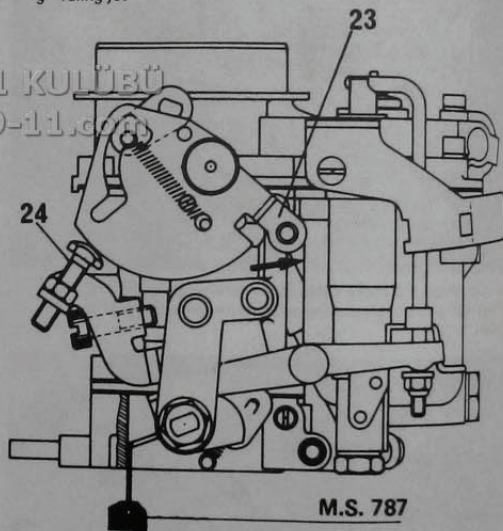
Initial throttle opening adjustment - Zenith carburettor (Sec 17)
